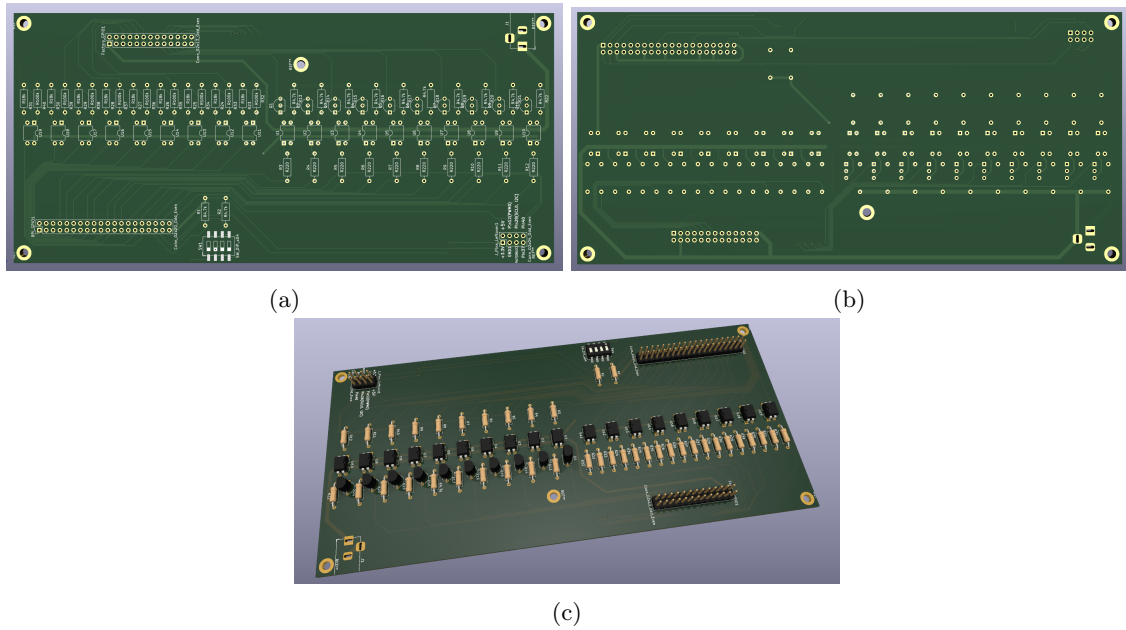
Images of the PCBv3 that was designed by the 3D viewer in KiCad. (a) Shows the front, (b) shows the back, and (c) shows an isometric view of the PCB with the soldered components
